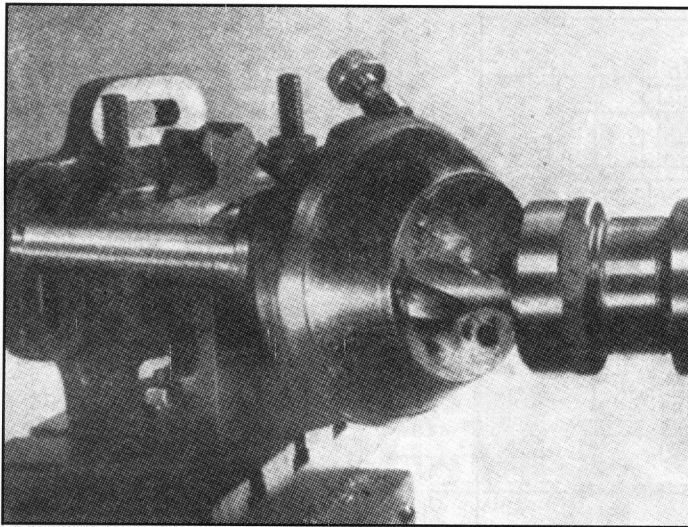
Spot facing wedge bolt holes with Clarkson slot drill.
